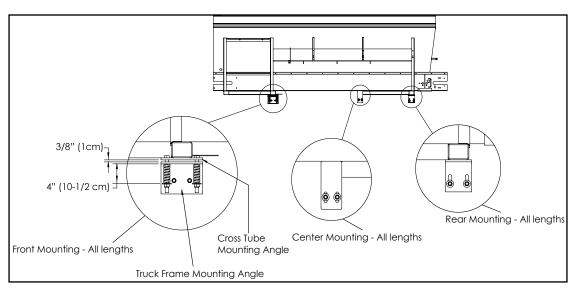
Mounting Angle Installation - NL4500G4 Edge
